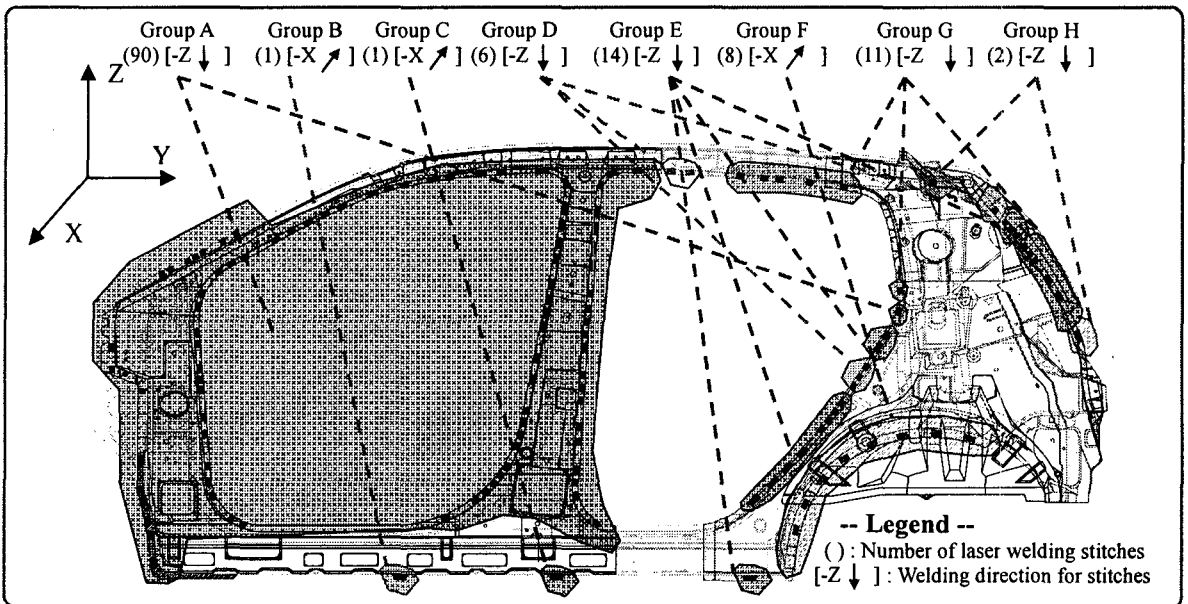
Grouping of laser welding stitches based on process parameters
